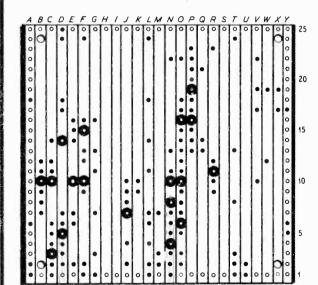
Layout of components on Panel B with underside view showing the breaks in the copper strip
